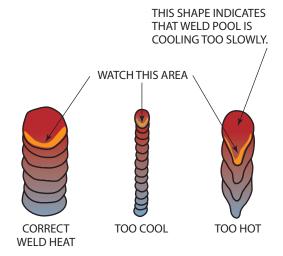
Watch the back edge of the weld pool to determine the correct current.
